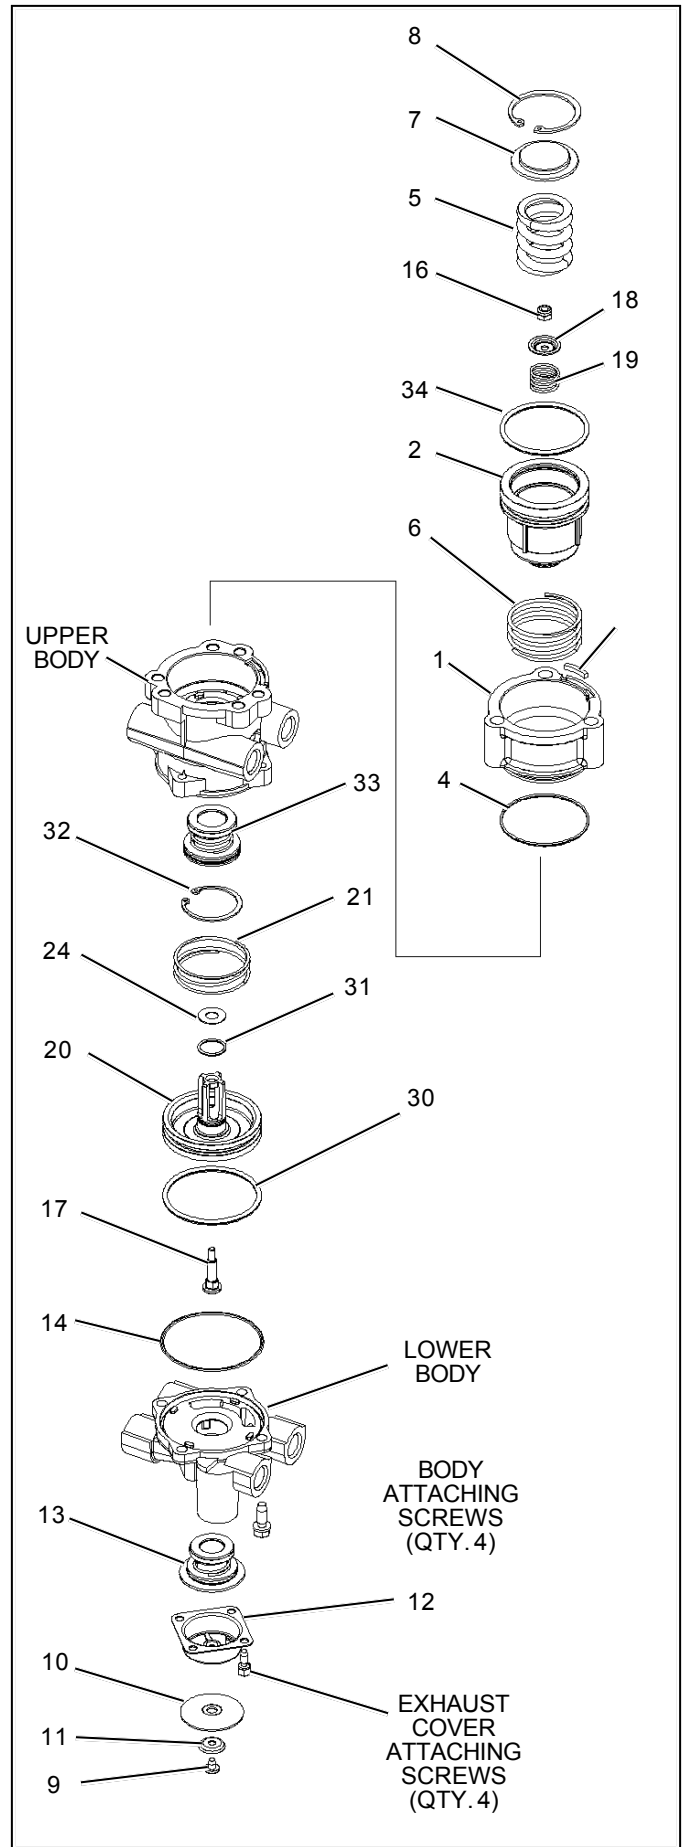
E-10P BRAKE VALVE - EXPLODED VIEW
